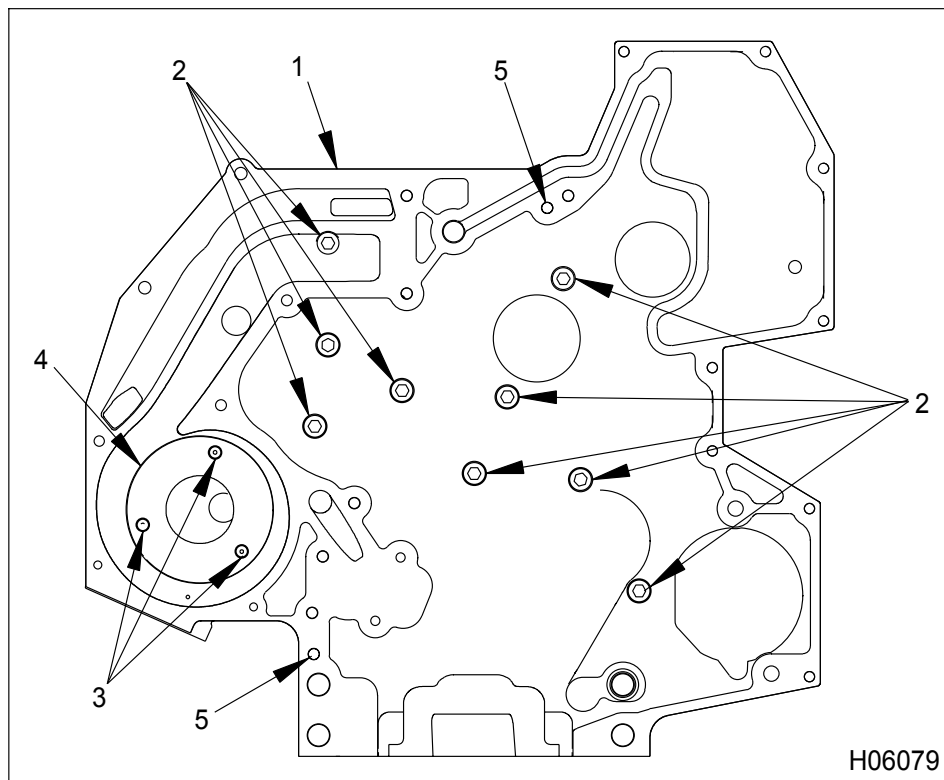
Front cover mounting bolts – rear half (Generation 1)
